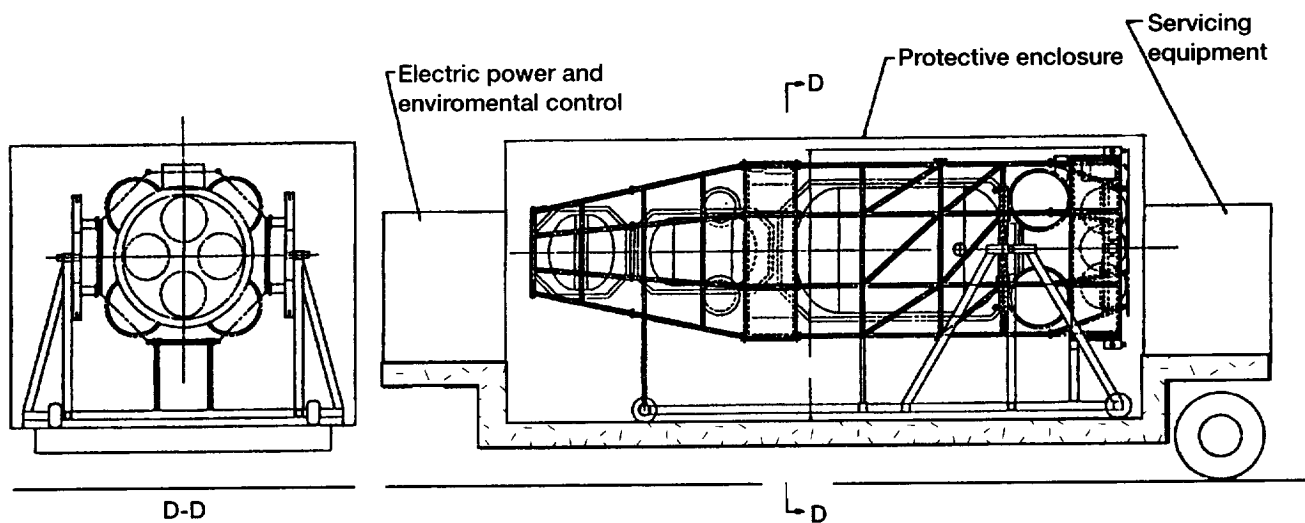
COLD-SAT spacecraft installed on trailer transport in handling dolly.
